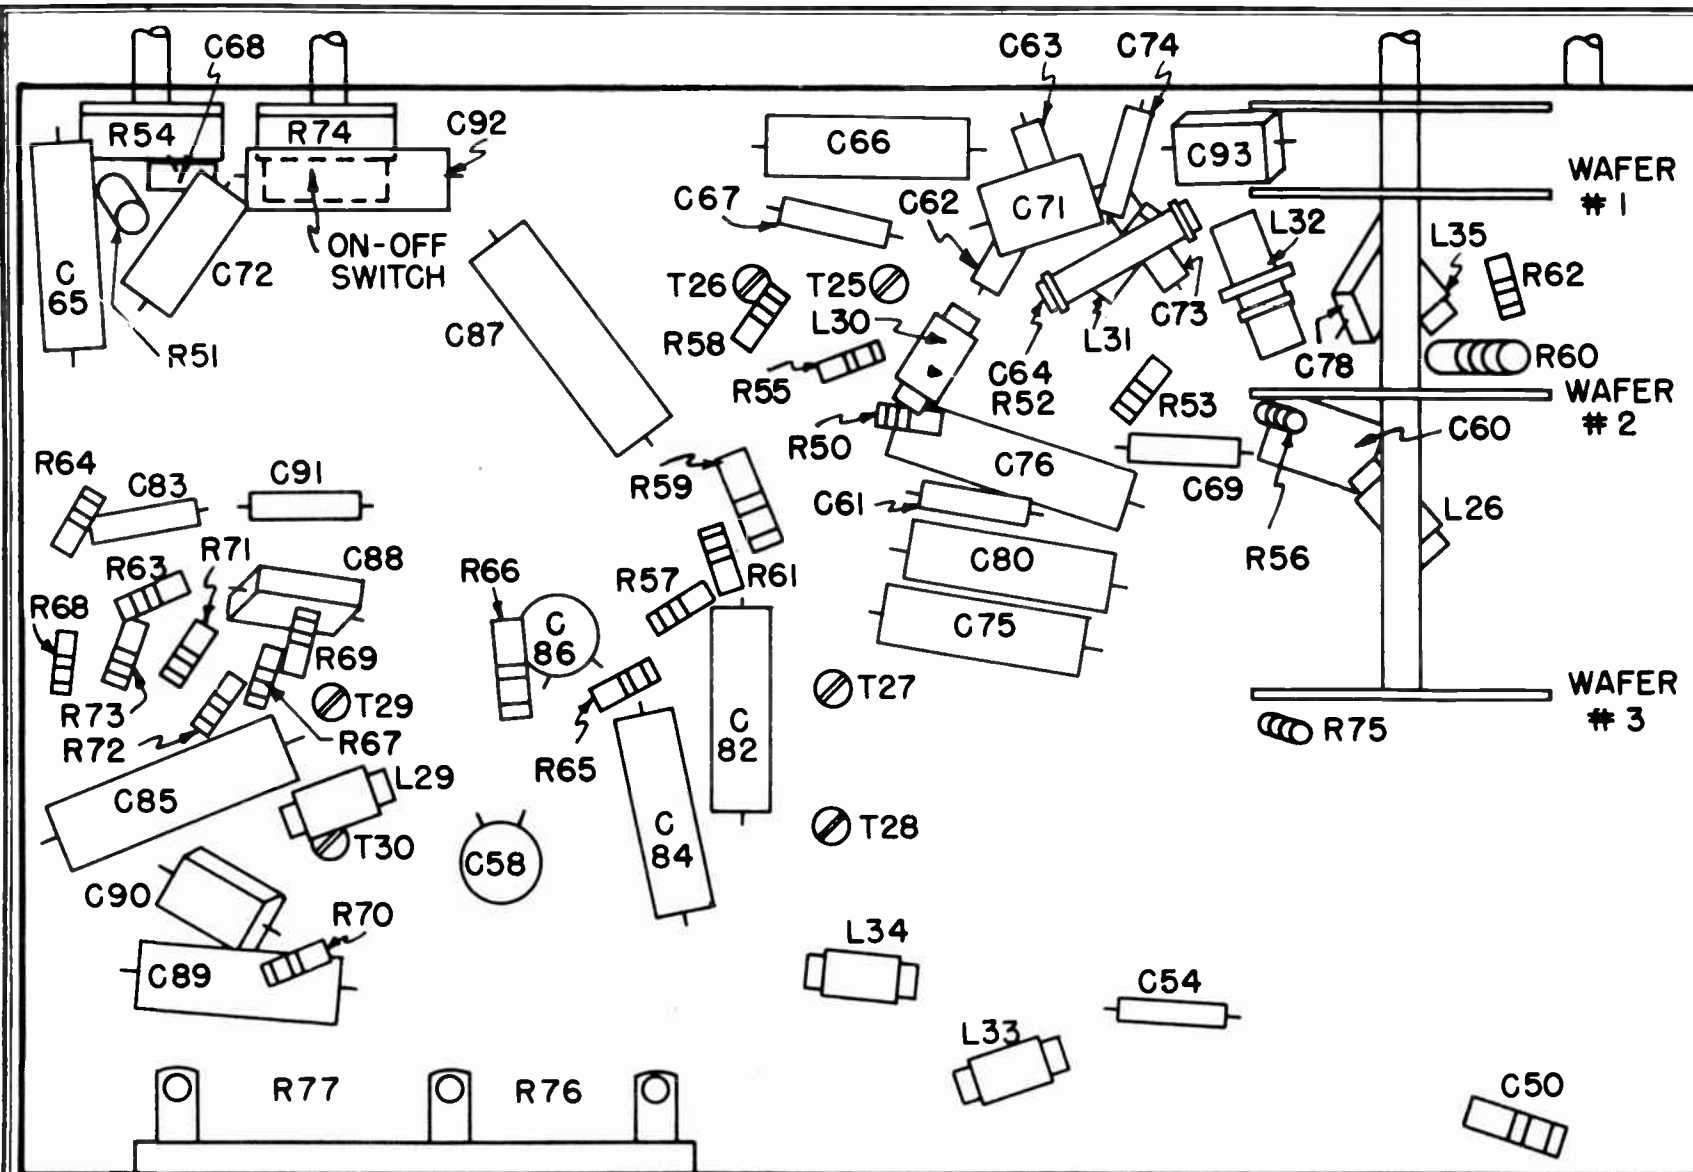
AM-FM TUNER CHASSIS BOTTOM LAYOUT
